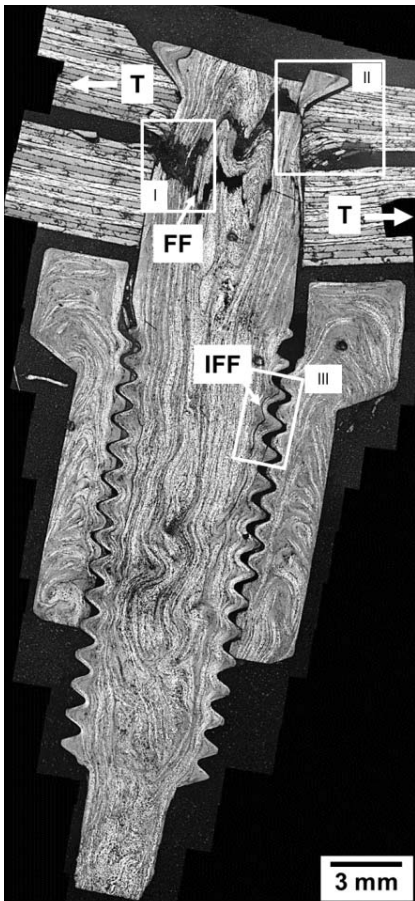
Optical microscopy cut view of a failed CFRP-bolt inside a SLS-specimen
